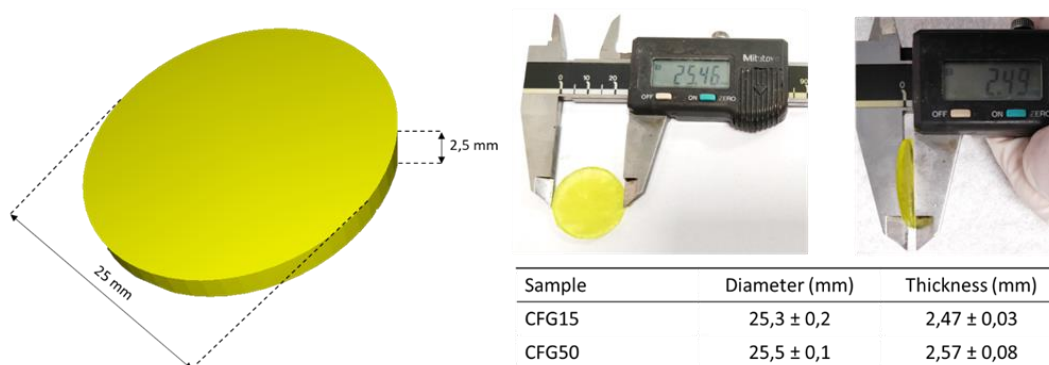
CAD fidelity of 3D printed flat disk geometry.
